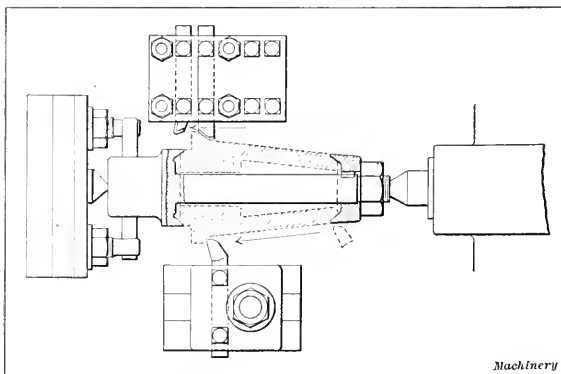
Finishing Tool Arrangement for Bushings shown in Fig. 7
